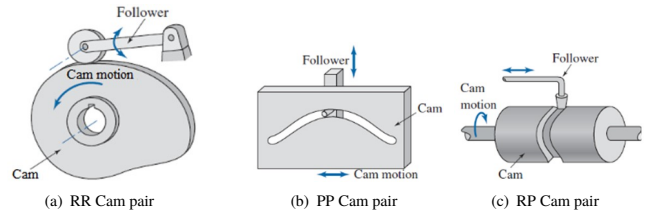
Three types of cam mechanisms joints. shown in Fig. 7.
